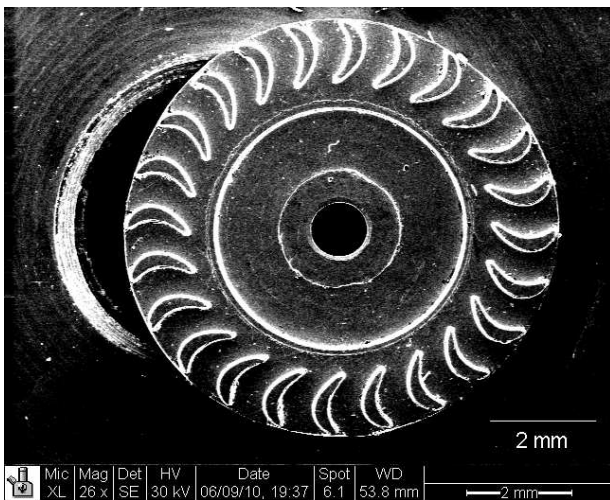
The turbine rotor machined from 303 stainless steel using CNC milling
